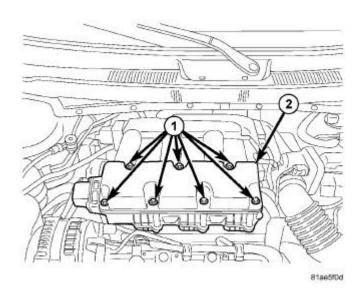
INTAKE RETAINER VIEW Courtesy of CHRYSLER LLC
